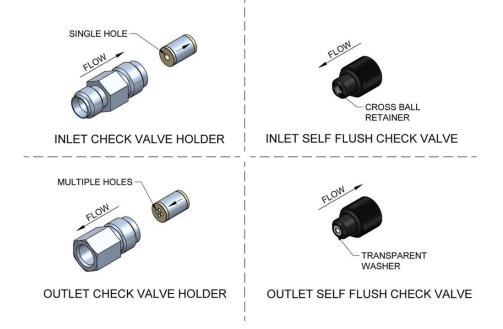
, Check Valve Assembles for Pump Head and Self-Flush Housing
